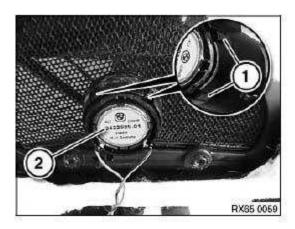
Catches And Speaker Courtesy of BMW OF NORTH AMERICA, INC.
